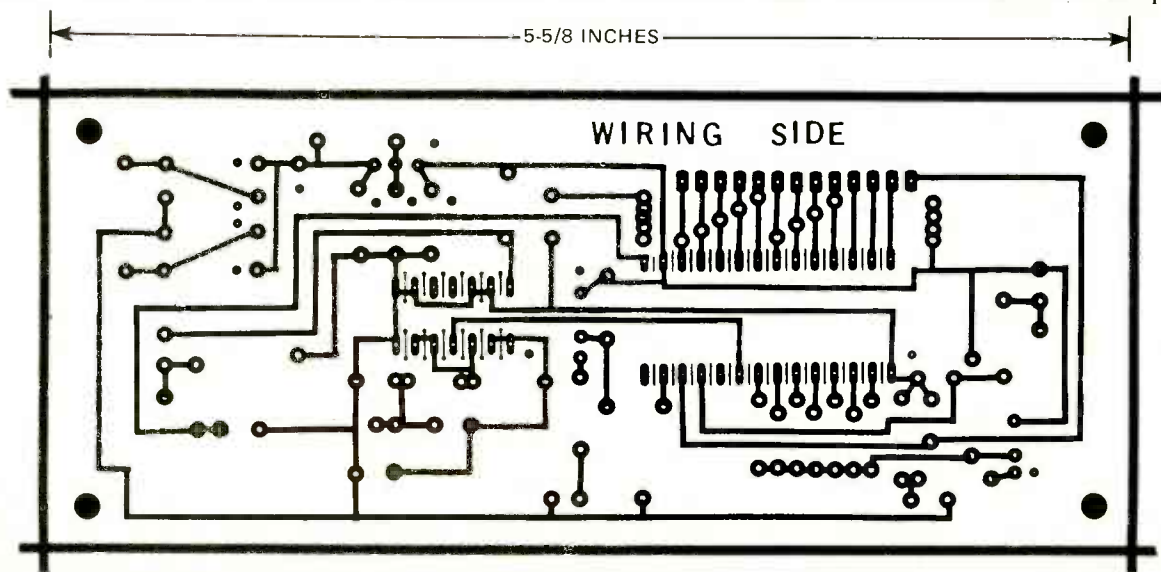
PC BOARD foil pattern. Dots in corners indicate position of mounting holes.
